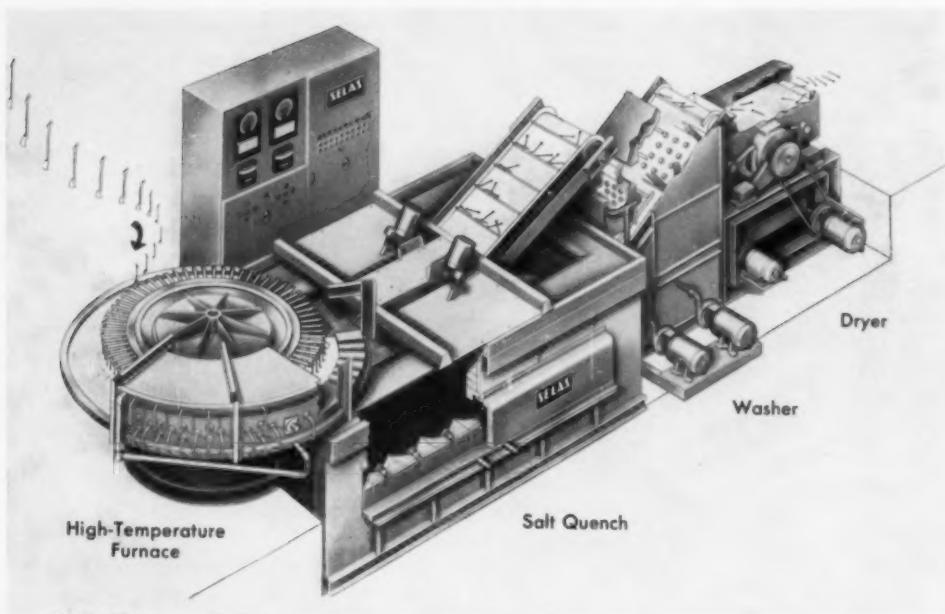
This Automatic Heat Treating Machine Austemps 5000 Small Parts per Hr. for Use in Business Machines
